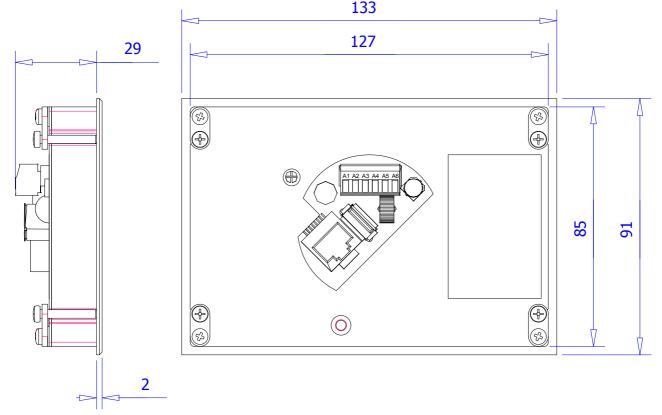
Mechanical dimensions and placement of the ID-32 module connectors Notes:
